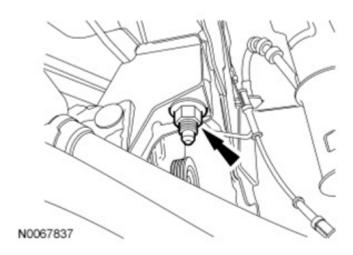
Locating Subframe Bolts Courtesy of FORD MOTOR CO.
